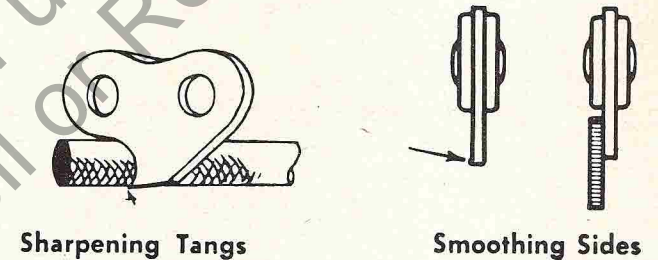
Sharpen tangs of drive links to keep guide groove clean. Smooth burrs from side of tang with flat file.
